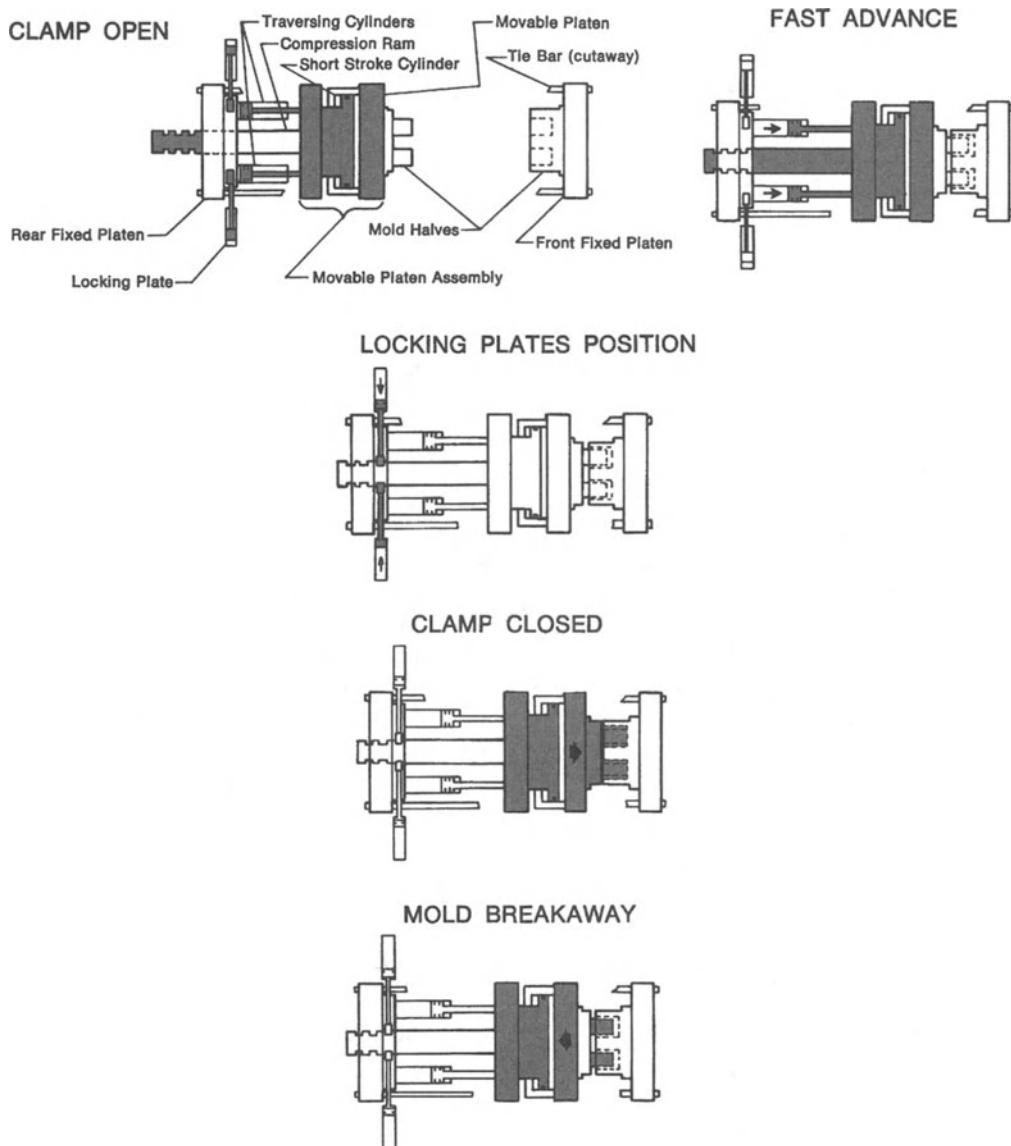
Example of a series of small hydraulic cylinders for opening and closing the mold.
